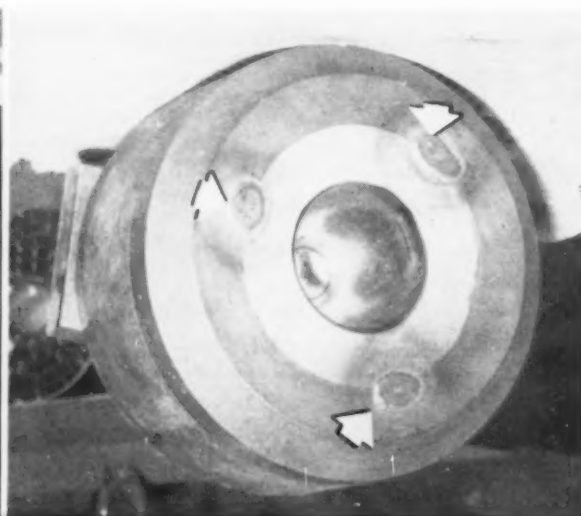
The three small welds shown here are for temporary bonding to hold the forming die in the round bed.
